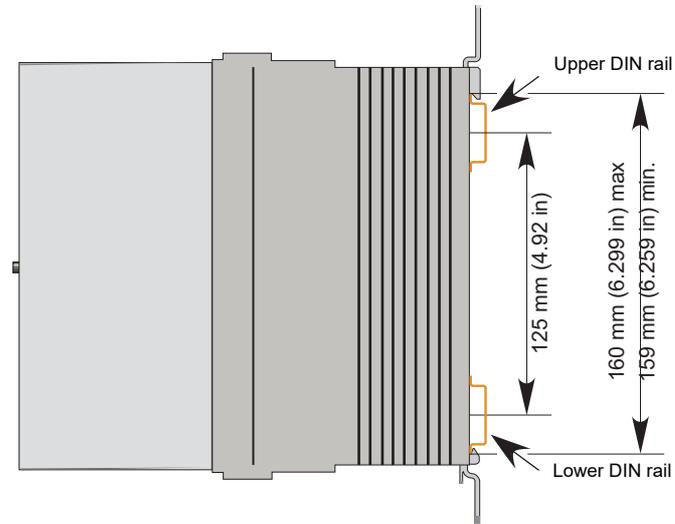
DIN rail mounting details for 80A, 100A and 125A units
